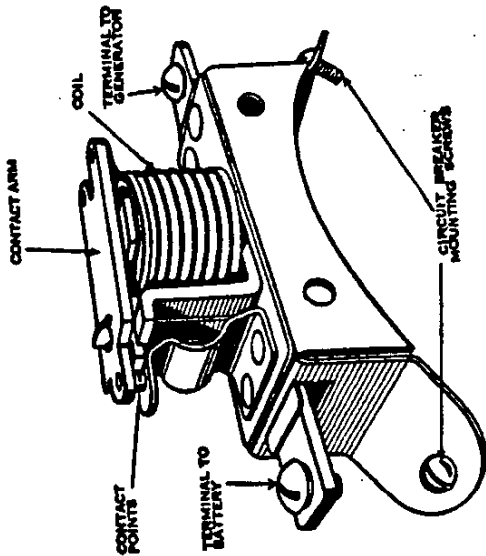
Illustrates the circuit breaker with the metal cover removed.
